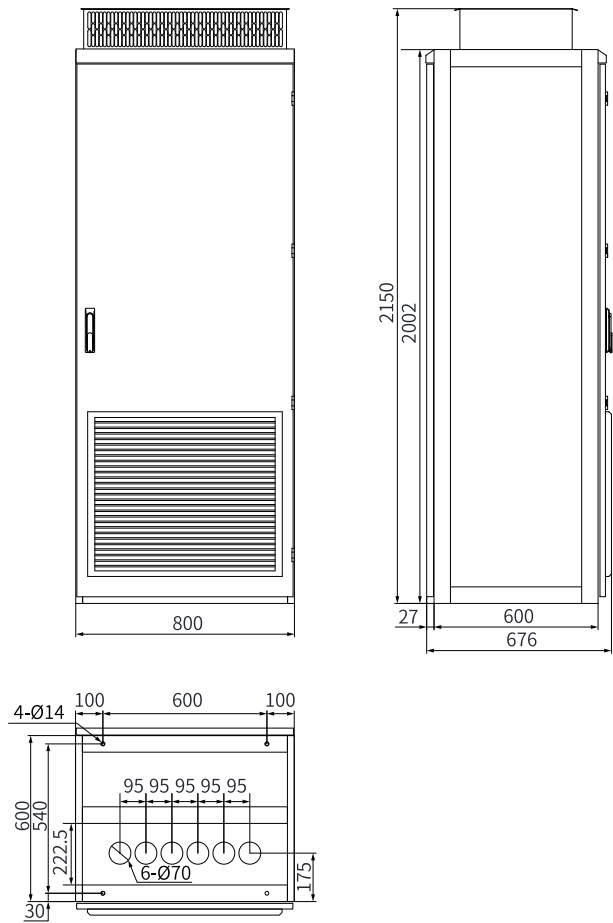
800-mm wide H1 to H6 drive cabinet (mm)
